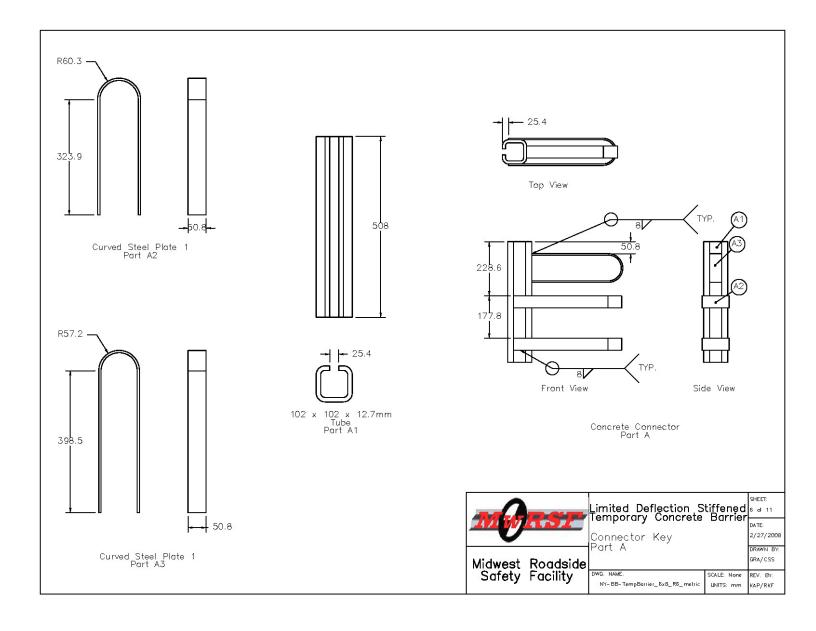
Temporary Concrete Barrier Connector Assembly Details, Test NYTCB-3
